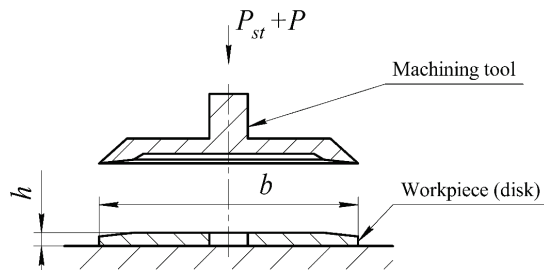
Scheme of oscillatory impact of the machining tool on the workpiece (disk)
